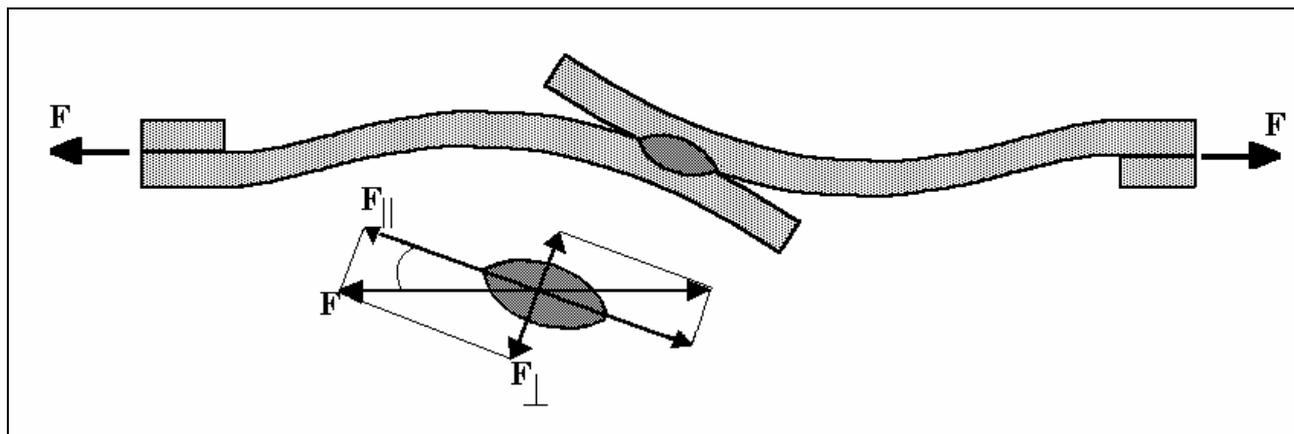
Slanting of weld spot subjected to tensile shear, superimposed cross tension by slanting
